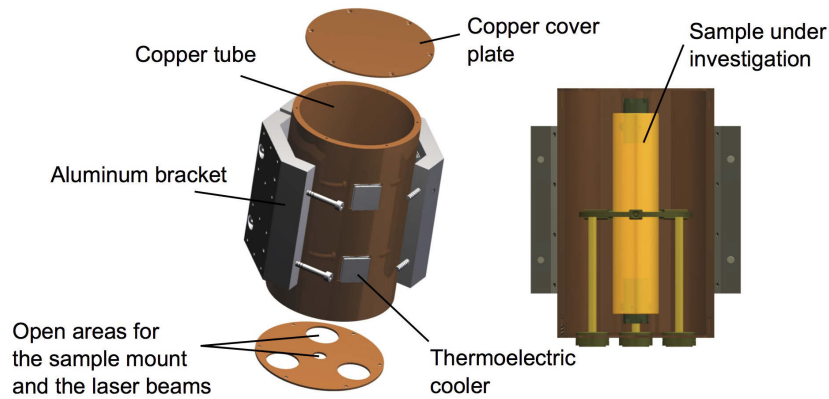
Heating device assembly on the left, sectional view including the sample on the right [49].
